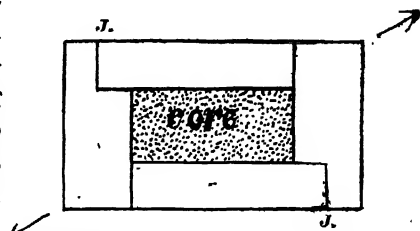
HORIZONTAL SECTION OF BOX AND CORE.
